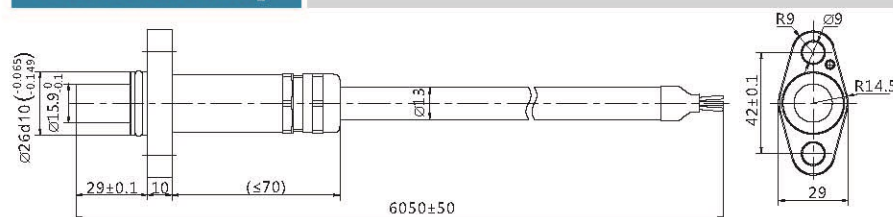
TQG19D8 Speed Sensor Outline Drawing
